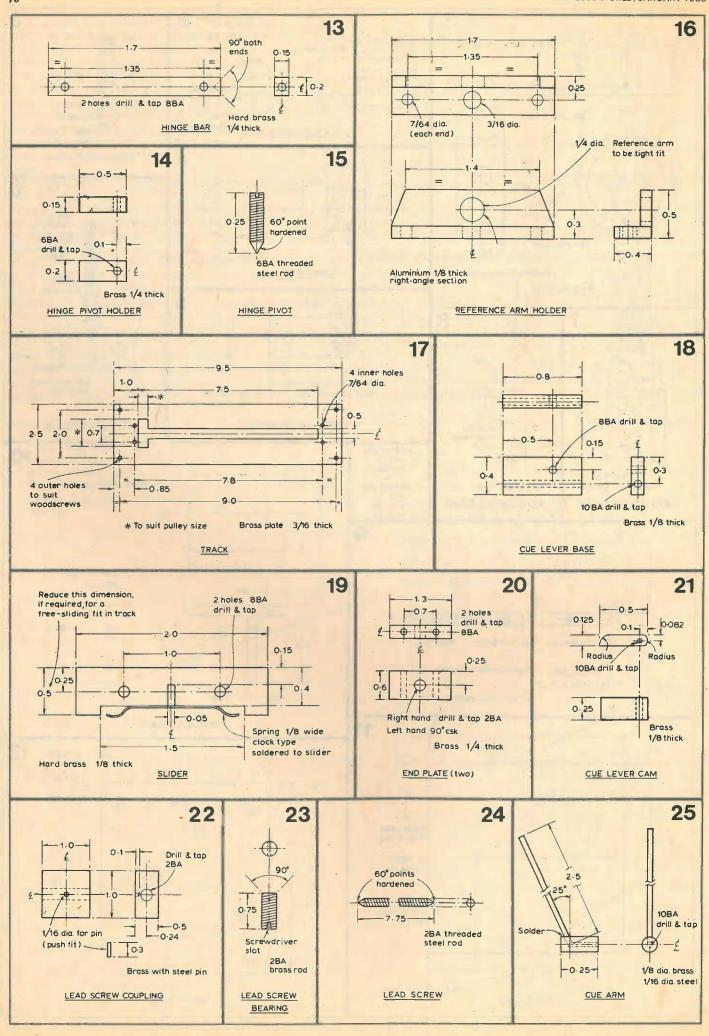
Lower assembly comprised lead screw arrangements as shown, together with drive mechanism pictured in December issue.
